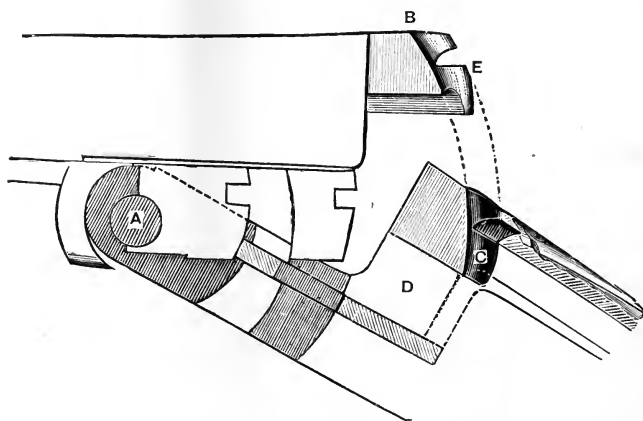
WESTLEY RICHARDS TOP RIB-EXTENSION, WITH SOLID JOINT-PIN AND BOTTOM BOLTS.
